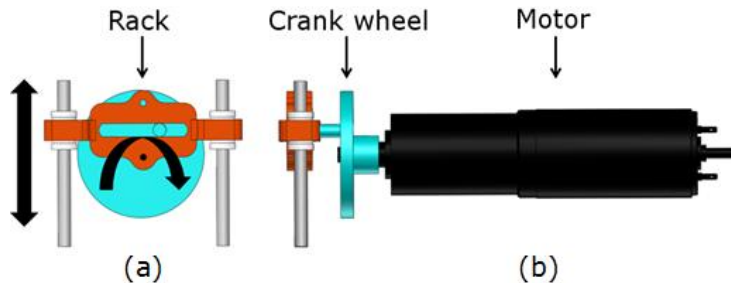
Overall design of the Scotch yoke mechanism. (a) front view
